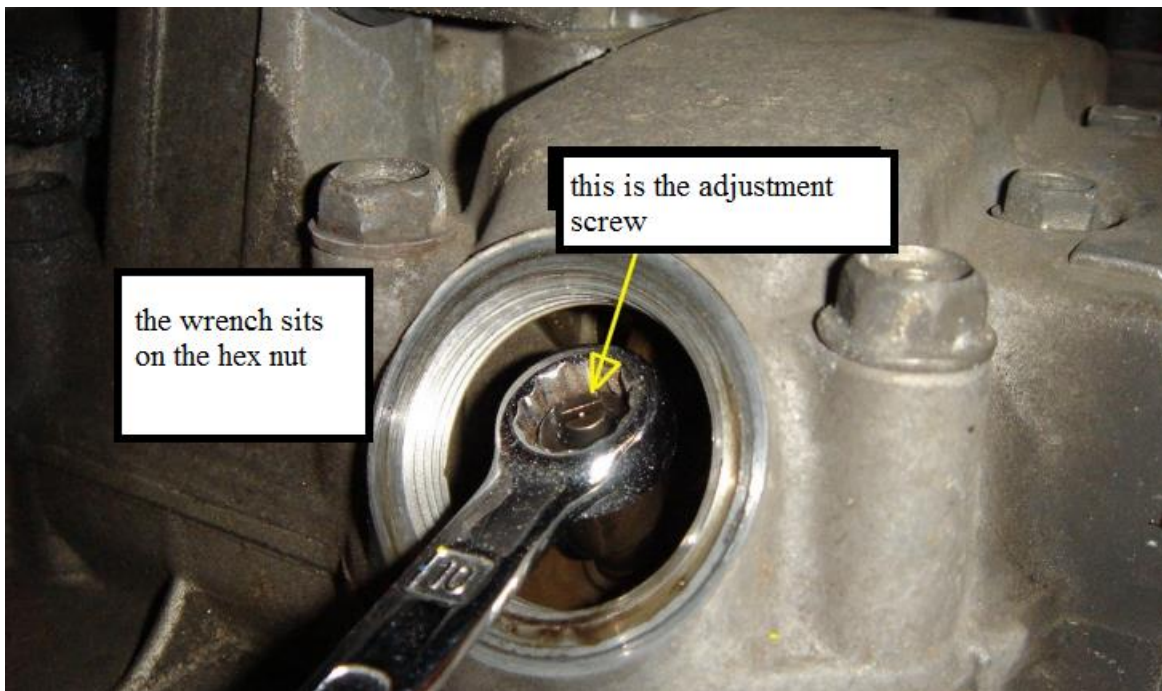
to loosen the lock nut on the rocker arm with a 10 wrench, then the set screw can be rotated
